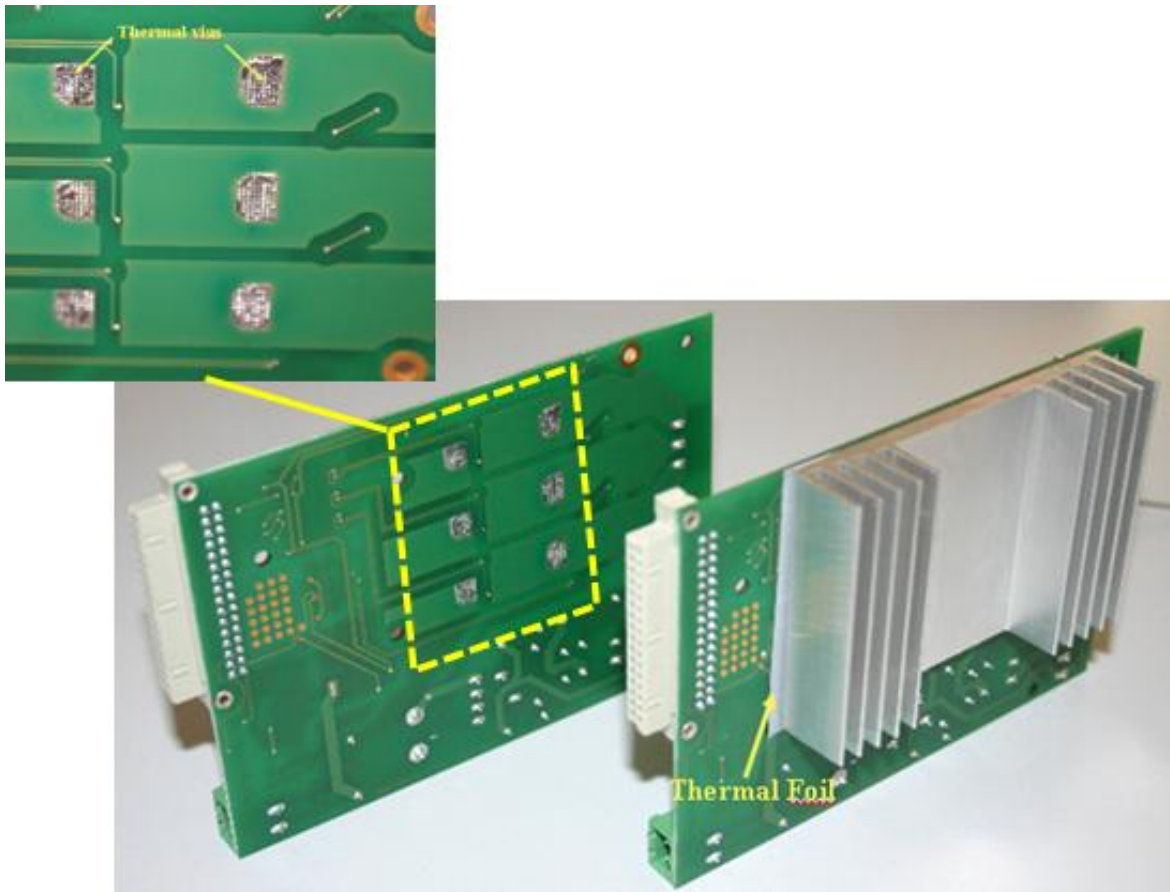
Example of thermal Vias and Heatsink mounting for RC-D and RC-DF test boards
